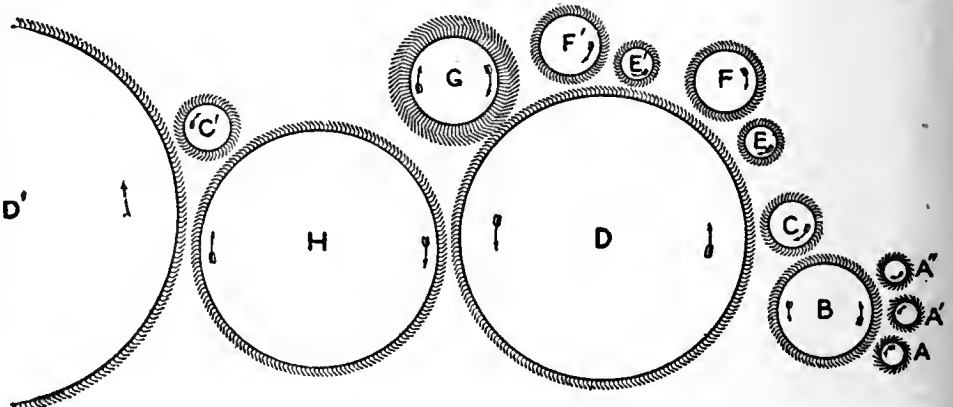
Sectional View of Carder; illustrating the principles of carding.
